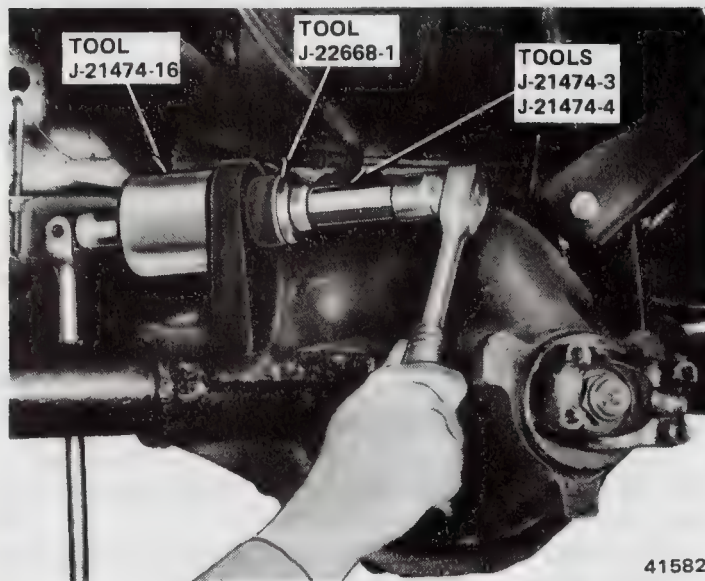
N-5 Axle Housing Upper Control Arm Bushing Removal
